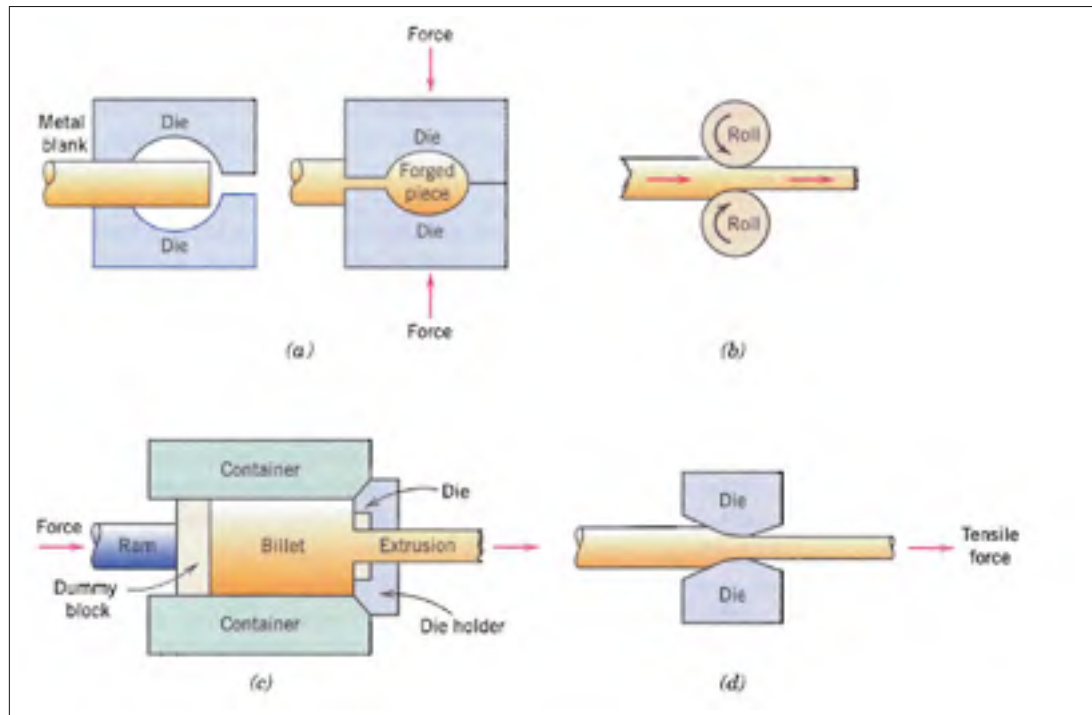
The most common forming tasks. In (a), forging; in (b), rolling; in (c), extruding; and in (d), drawing.
